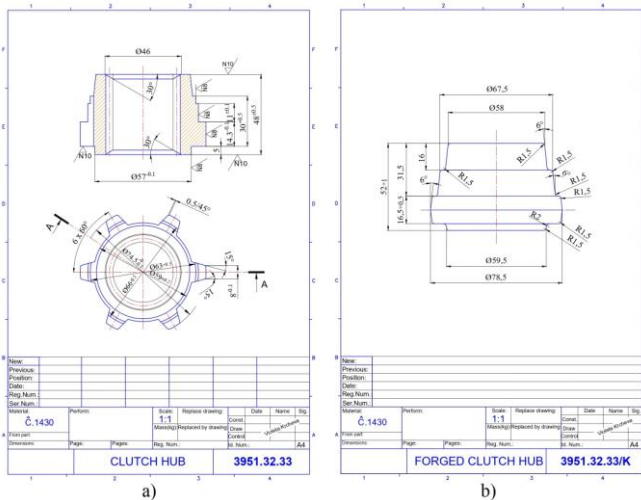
(a) Clutch hub, (b) Forged clutch hub
